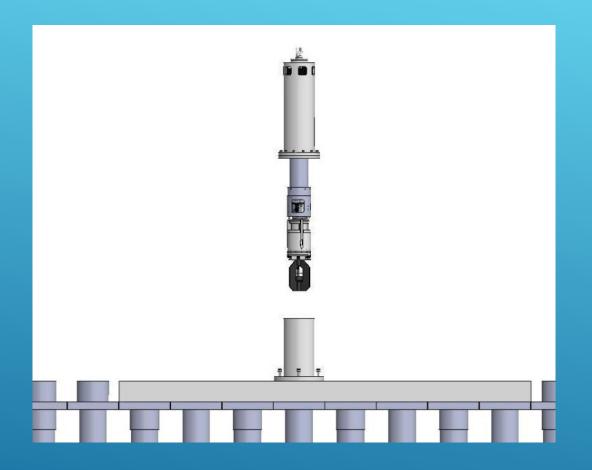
The cutting machine head is hold by crane above the tube to be cut
